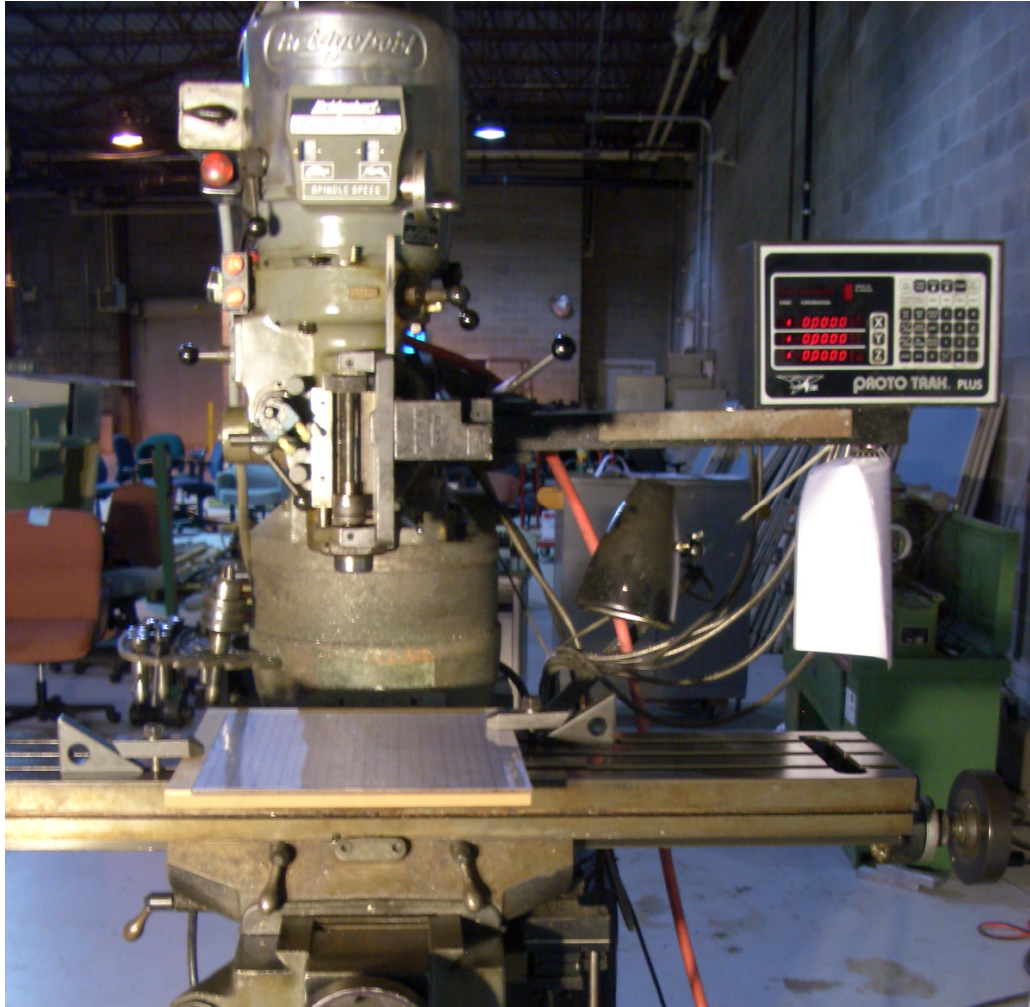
Photograph of the Bridgeport Milling Machine.
